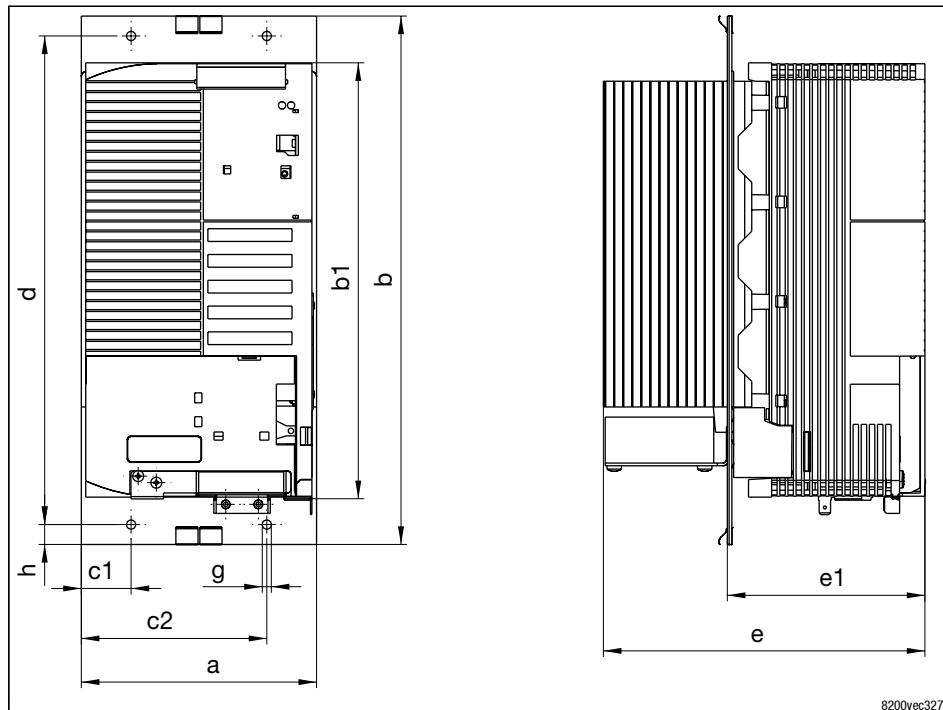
Dimensions for thermally separated mounting 3 ... 11 kW
